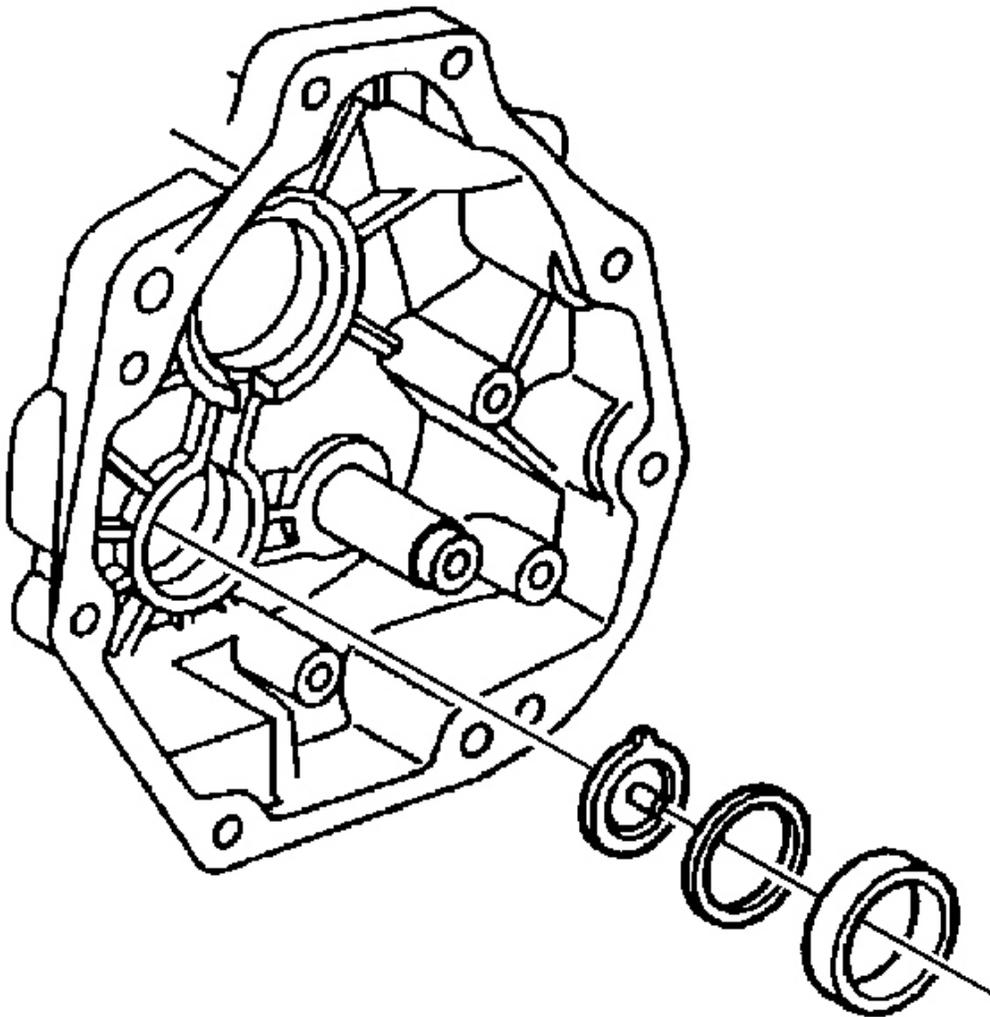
View Of Countershaft Extension Bearing Race, Funnel & Shim
